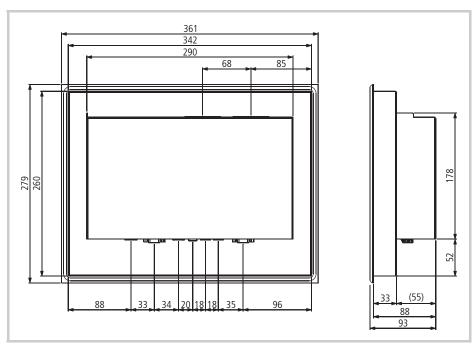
Mechanical dimensions of the 12.1" devices with standard or stainless steel front in mm
